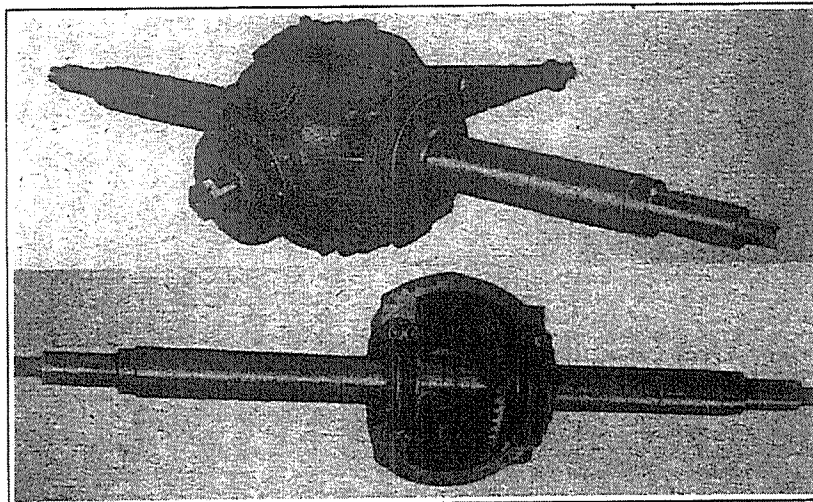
Arrangement of Driving Axle, Bevel Gearing, Housing and Torque Arm, Canadian National Gasoline Car 15,816.
